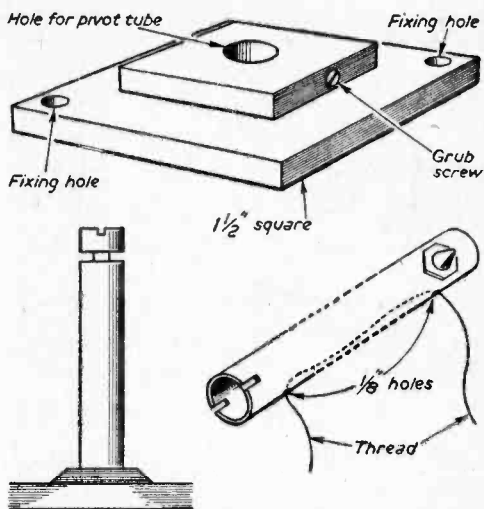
The mounting pedestal and a method of inserting the pick-up wiring.
